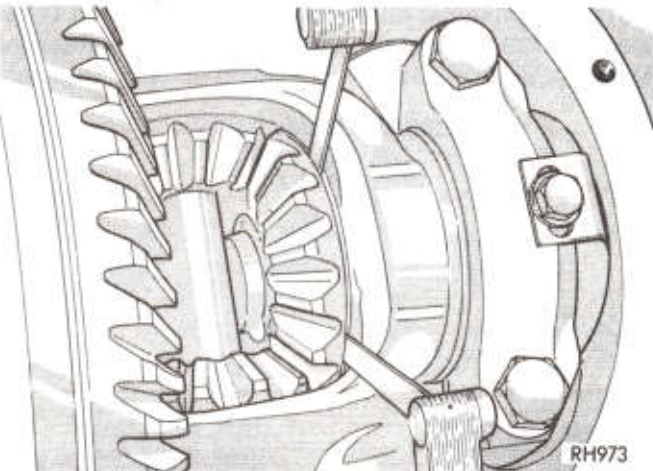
Insert a Matched Pair of Thickness Gauges to Determine Clearance
